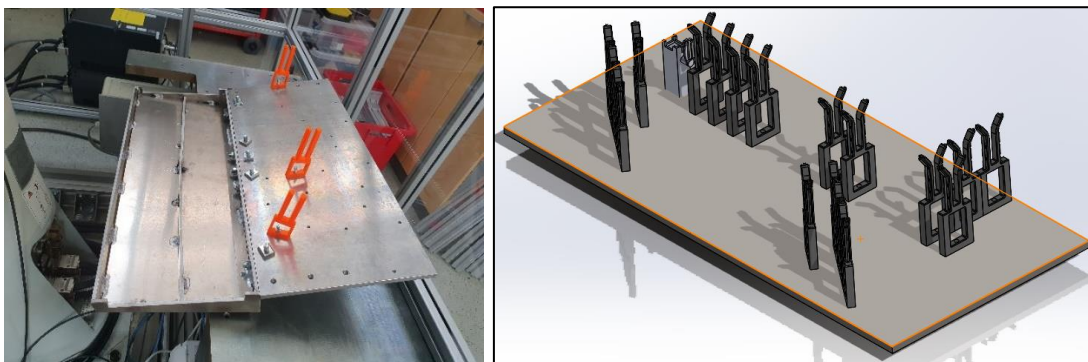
ELVEZ assembly layout. Left: simplified physical layout for simulations, right: 3D model of the final layout that will be implemented.
